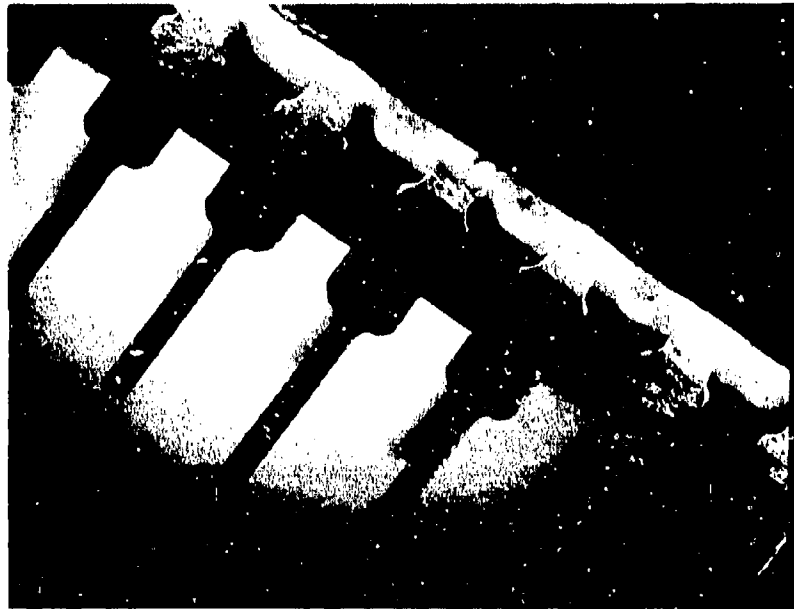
IC leads consisting of solder over Kovar, exhibiting poor solderability after 8 hour steam aging.
